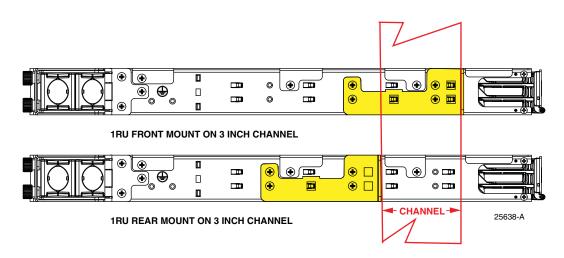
1RU Mounting Bracket Positions (Front and Rear on 3-Inch Channel)
